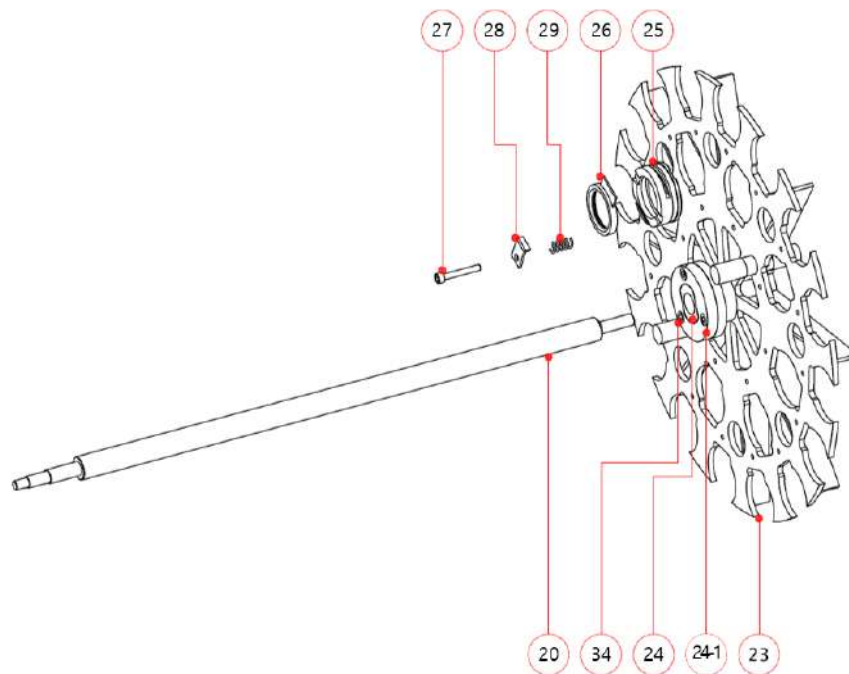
Disassembly of UV Unit Element (Right Side Cover)
